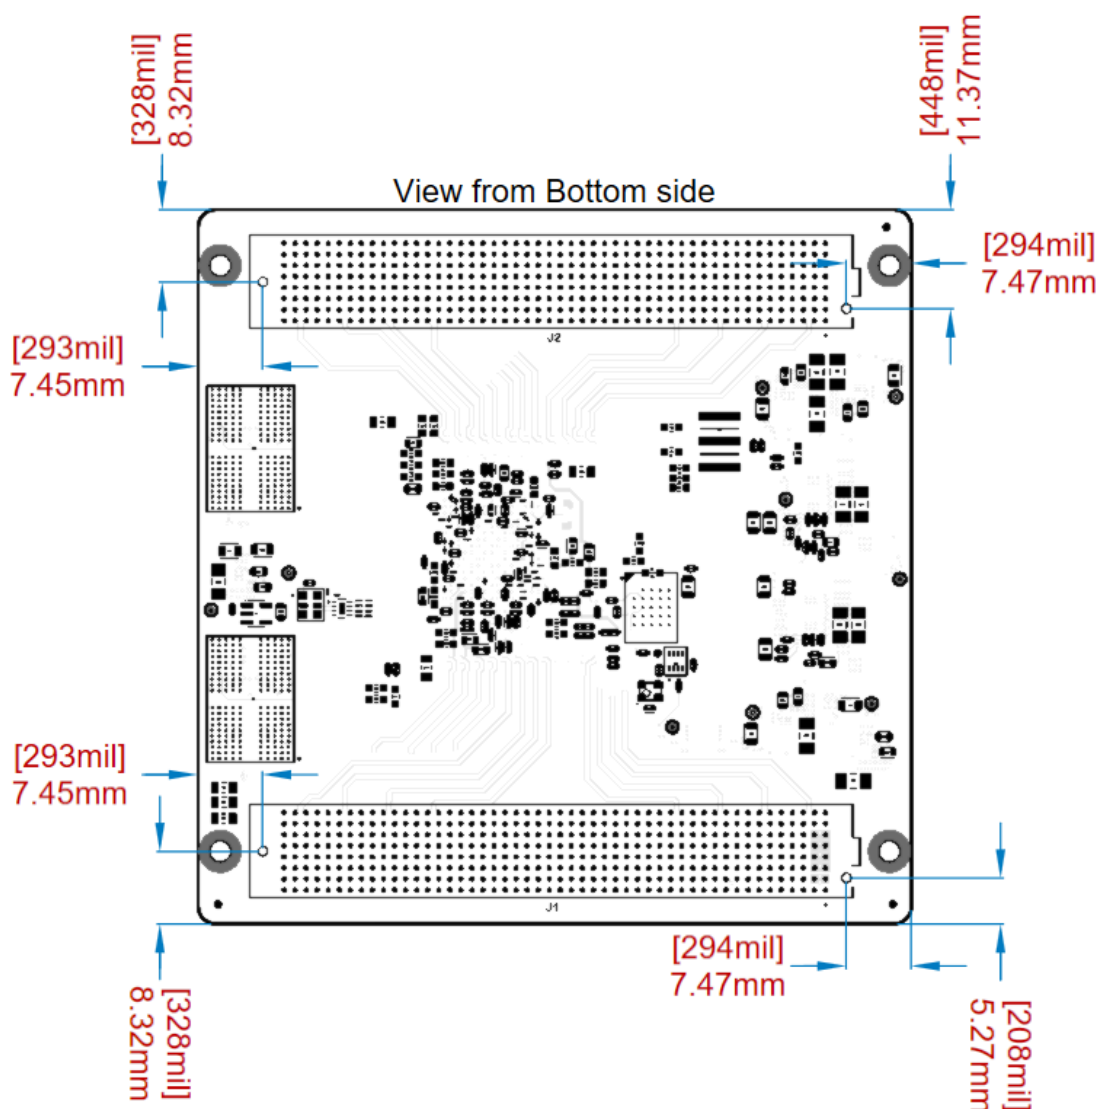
MitySOM-A5E Mechanical Outline, View from Bottom
